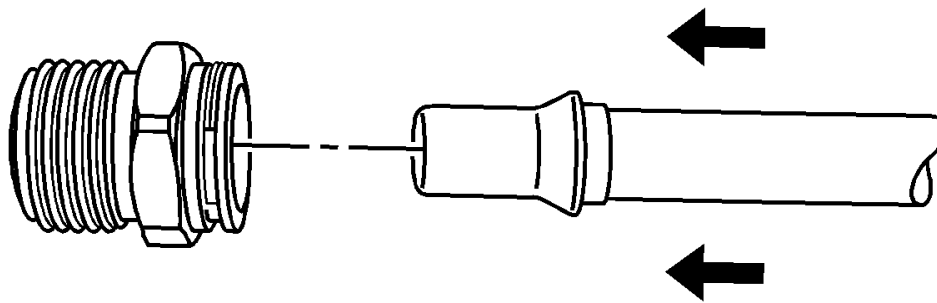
View Of Generator Cooling Inlet Pipe & Generator Cooling Inlet Pipe Fitting
